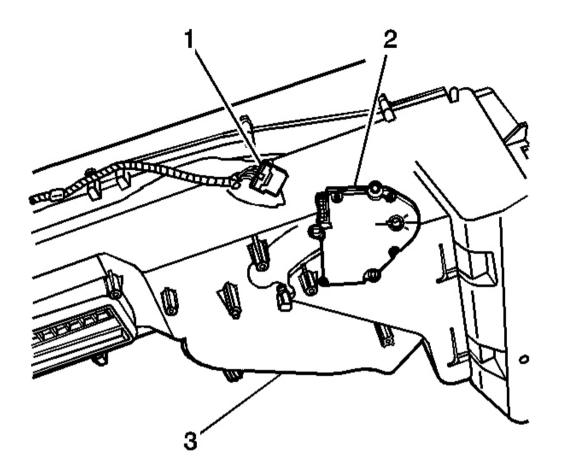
Left Air Temperature Actuator & HVAC Module Assembly Courtesy of GENERAL MOTORS CORP.
